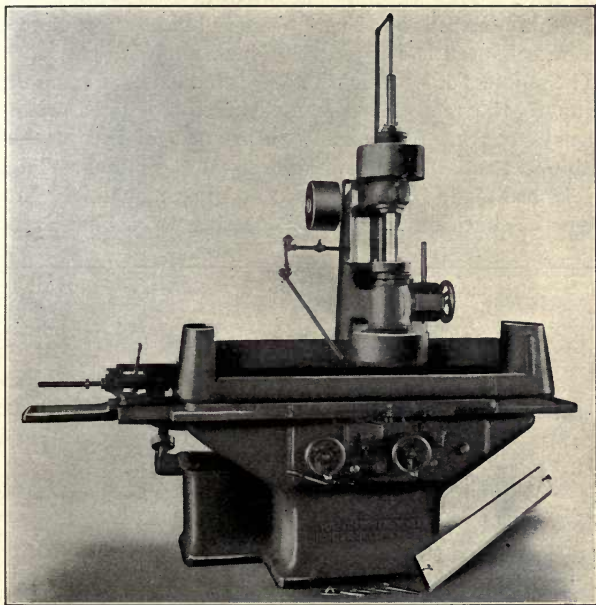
Pratt & Whitney surface grinder or vertical surfacer.
